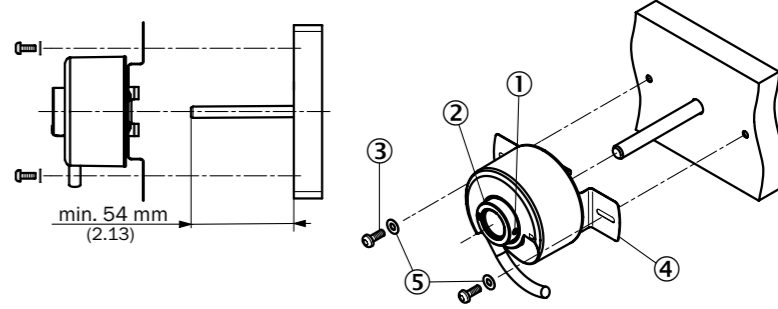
Mounting of DBS60 Core face mount flange via flange-side threaded holes
